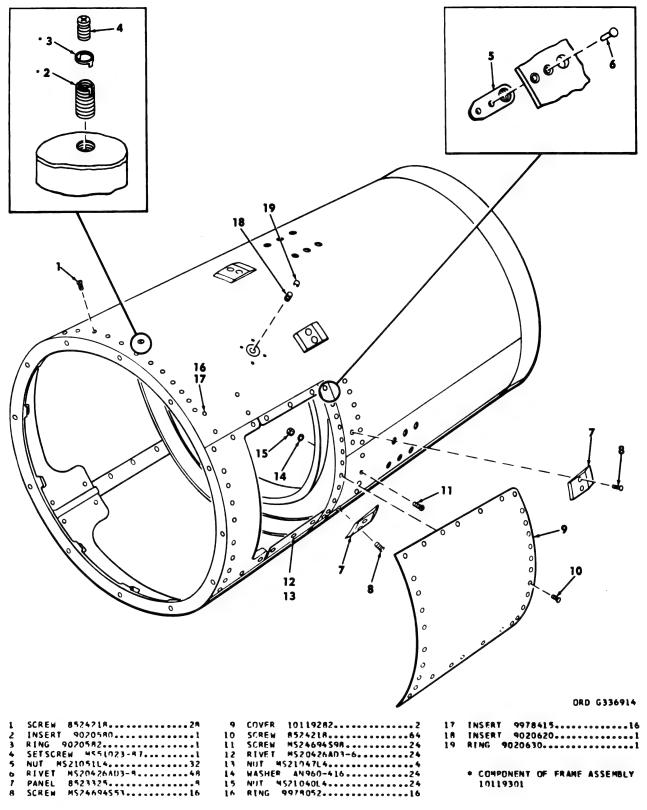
STRUCTURE ASSEMBLY, CONTROL /LOL19281/ /SEE FIGURE 161 FOR NEXT HIGHER ASSEMBLY/
